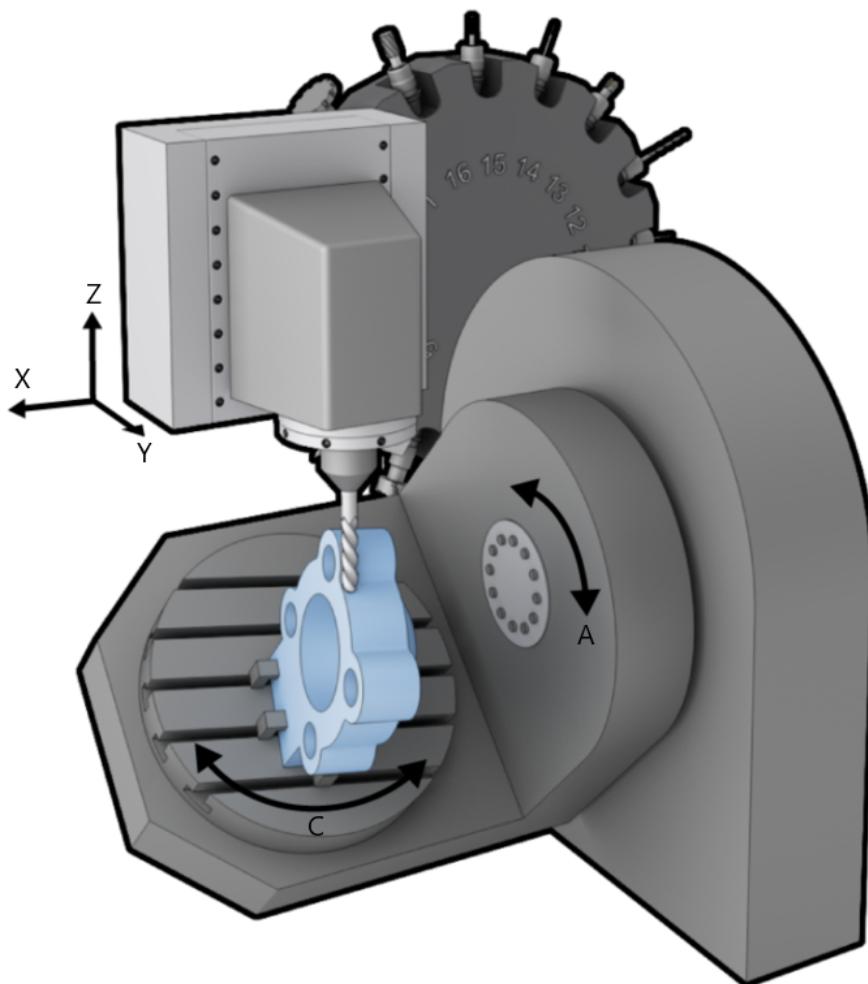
5-Axis CNC Machine (*Manufacturing Guide 2023*)
